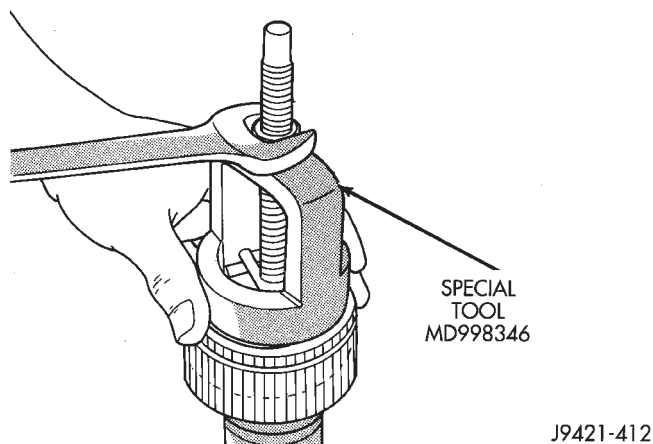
Tightening Puller Nut To Pull Bearing From Gear
